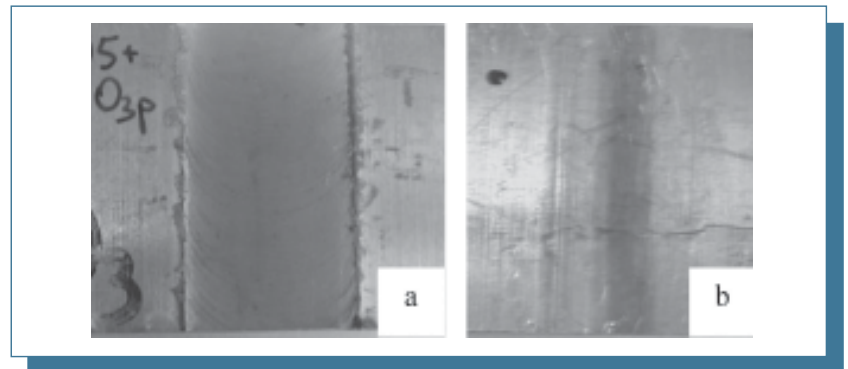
Friction Stir Welded composite plate: surface in contact with the shoulder (a) and opposite side (b).
